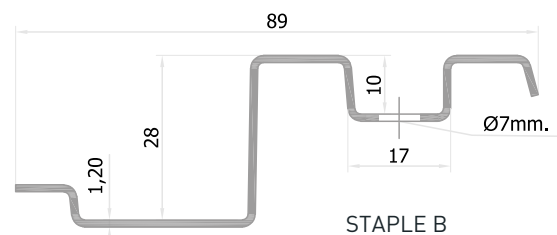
DETAIL JOINING OF ROOF AND POLYCARBONATE PANELS
